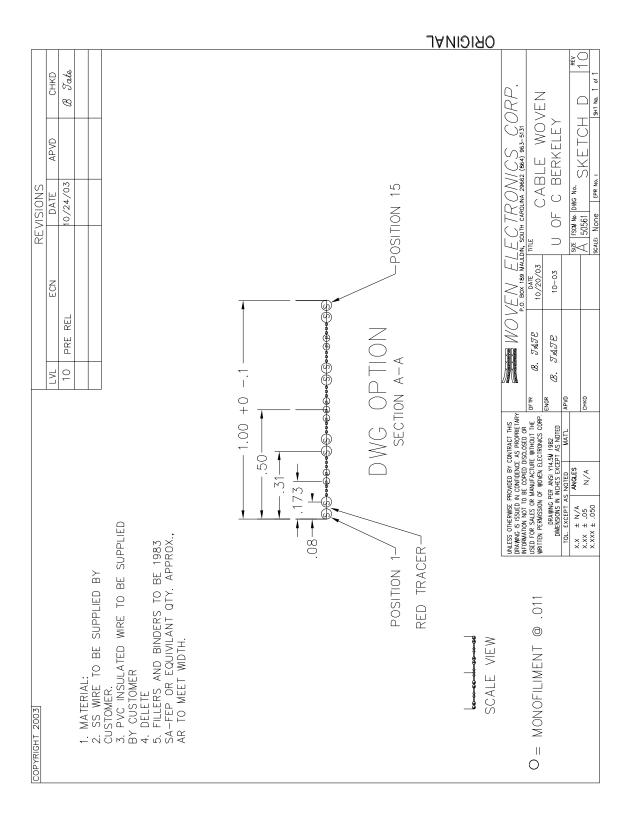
Technical drawing of control cable manufactured by Woven Electronics.
